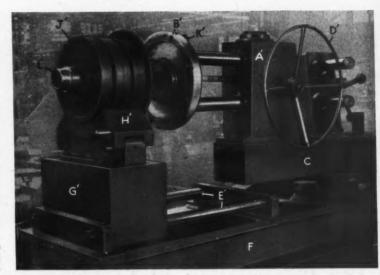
A rotor sub-assembly is here seen on the preliminary support which forms part of final assembly fixture. The support is moved to engage the rotor with the carrier whereby it is brought into alignment with, and inserted in, the previously-assembled stator
